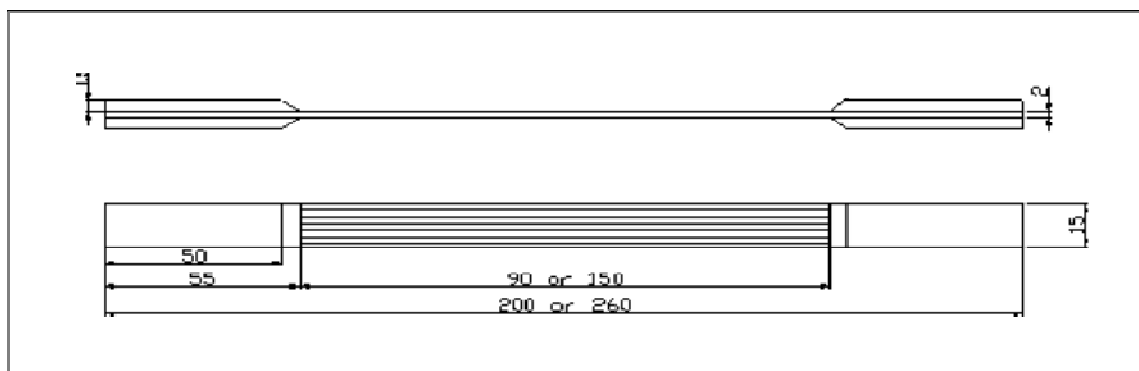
Longitudinal Flat Test Specimen(ASTM D3039)
